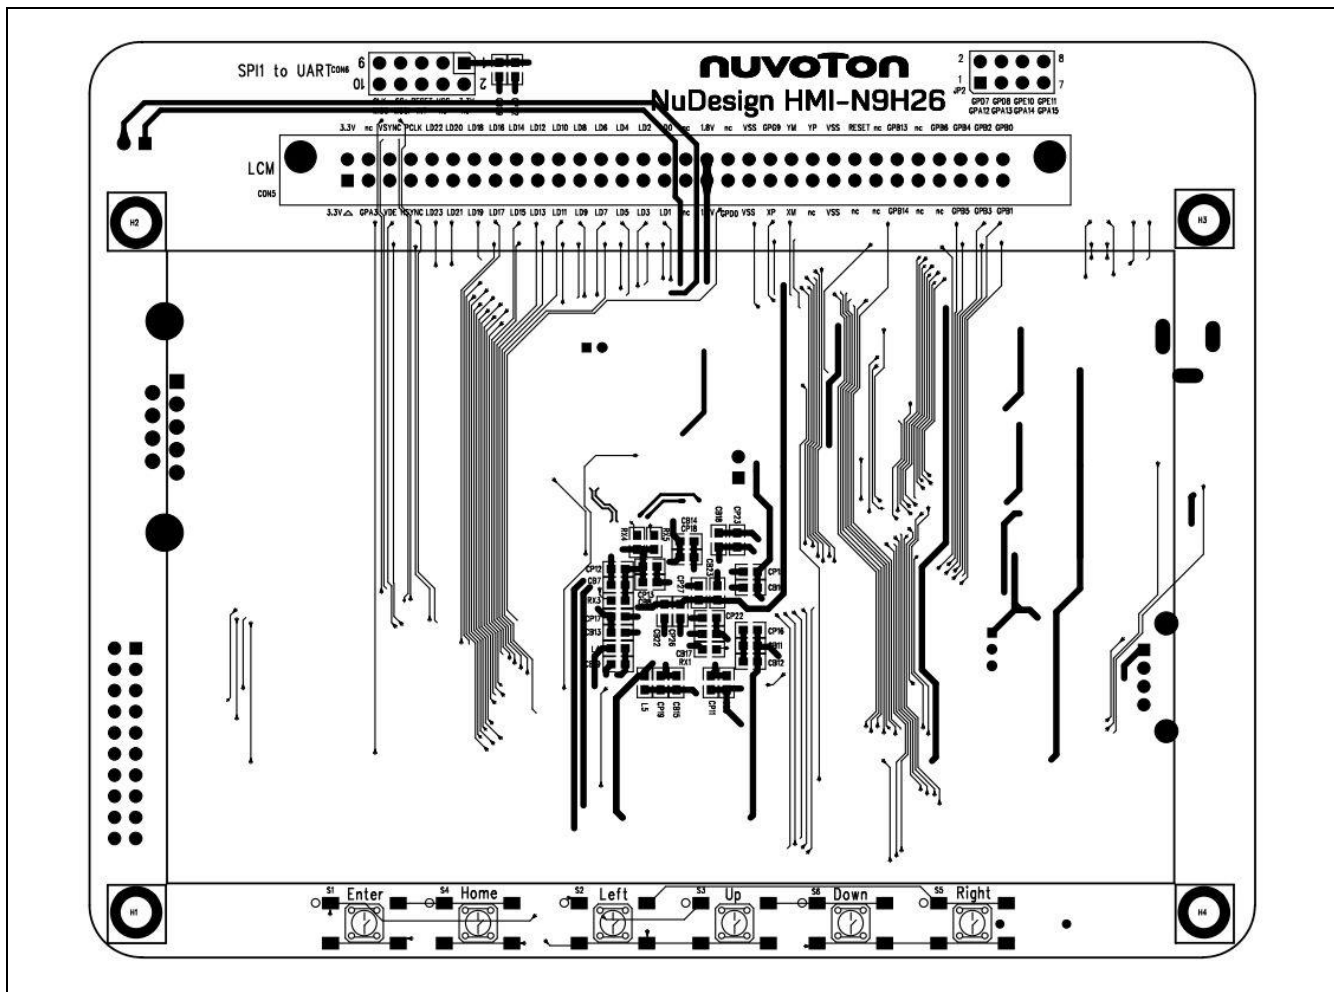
NuDesign HMI-N9H26 PCB Placement (Front)
